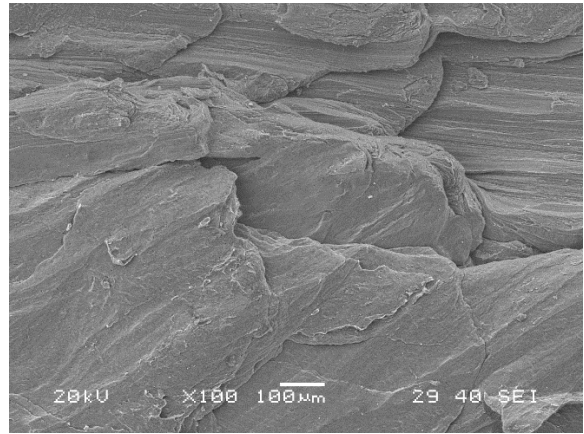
Magnified view of area 3 in weld 16
